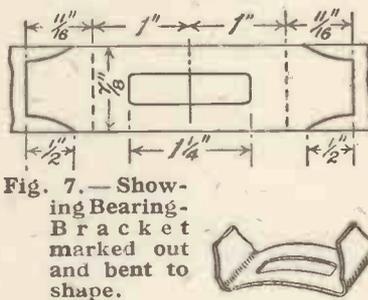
Showing Bearing Bracket marked out and bent to shape.
